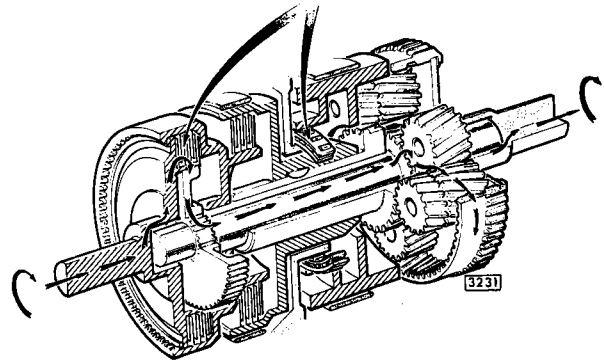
Mechanical power flow — First gear (Drive 1) selected
